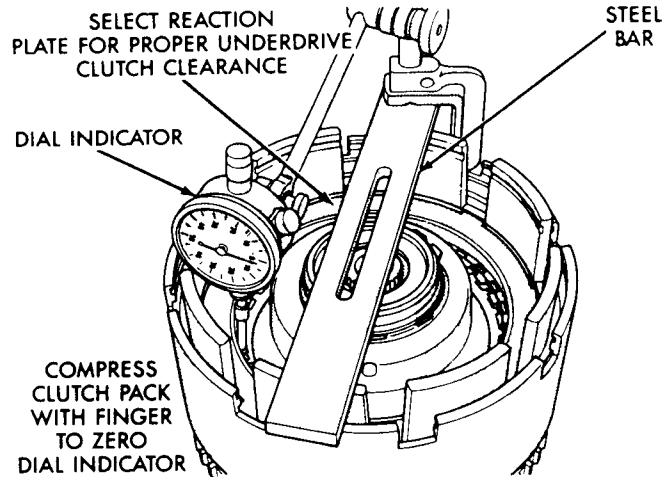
Set Up Dial Indicator for Clutch Clearance
